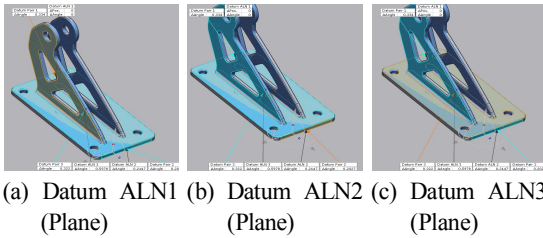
DLP 3D printed door hinge part datum alignment
